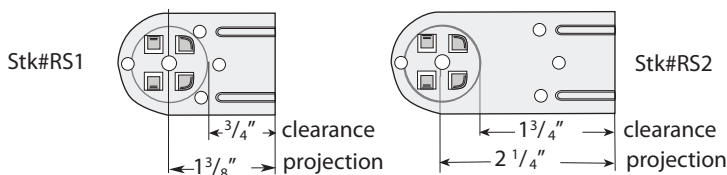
Brackets for Roller Spring (Stk# RS) and 1" tube
